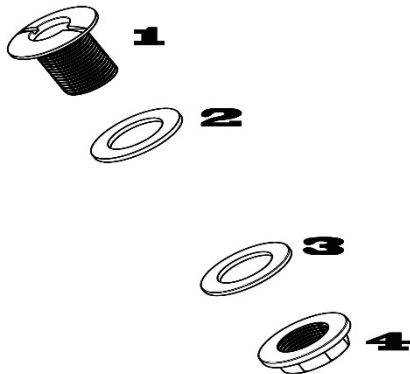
Bushing or tank fitting (the glass pane is placed between slide ring 3 and rubber ring 2)
